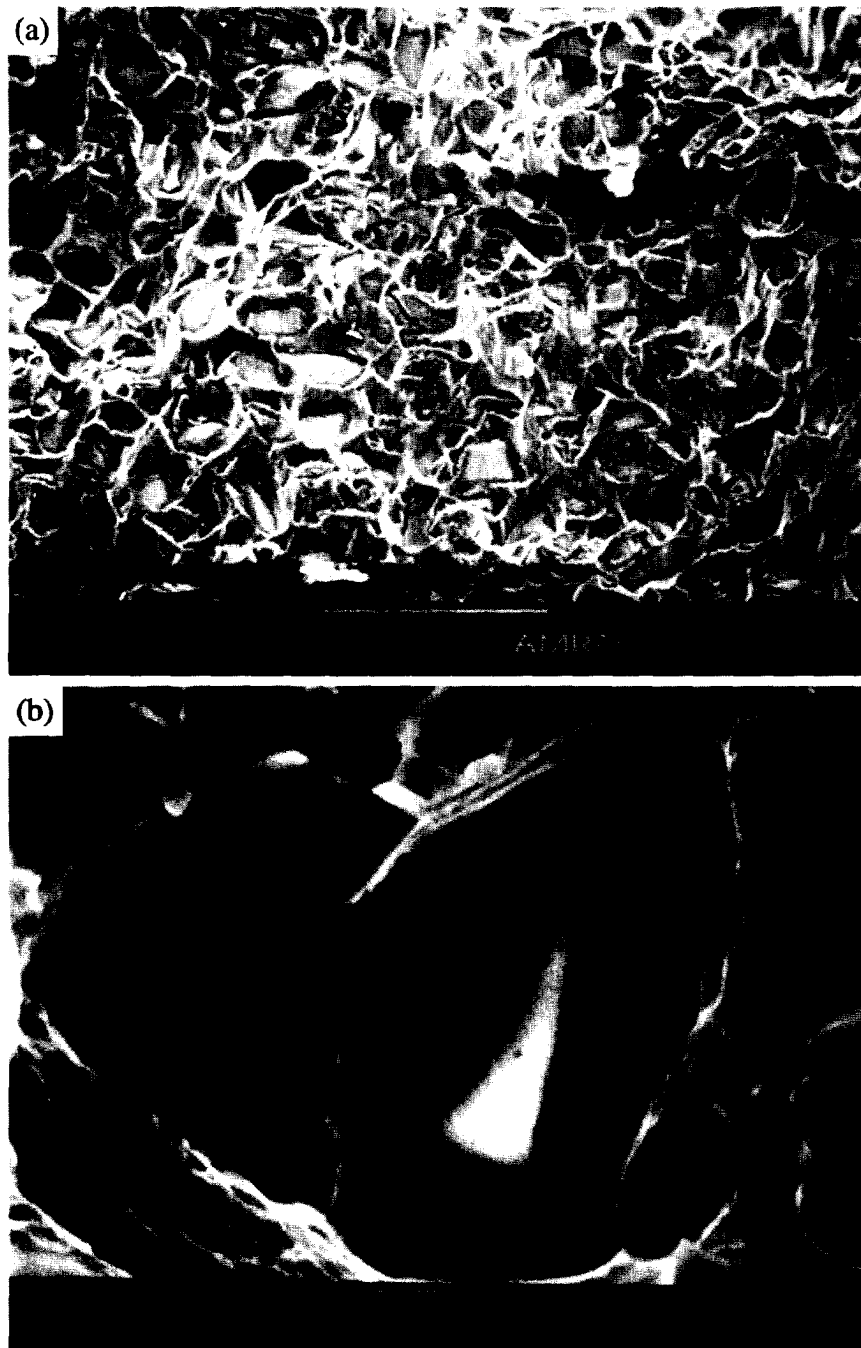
(a) Micrograph of the fracture surface of the composite; most of the dimples contain fractured particles. (b) A higher magnification picture, showing interface debonding and an example of particle pullout.
